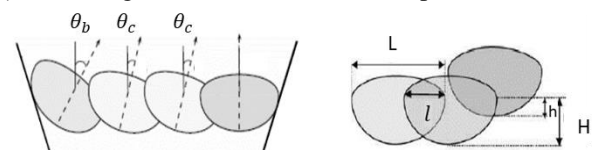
Multipass welding with tilt parameters (left) and lateral and vertical remelting of a pass (right) [16].
